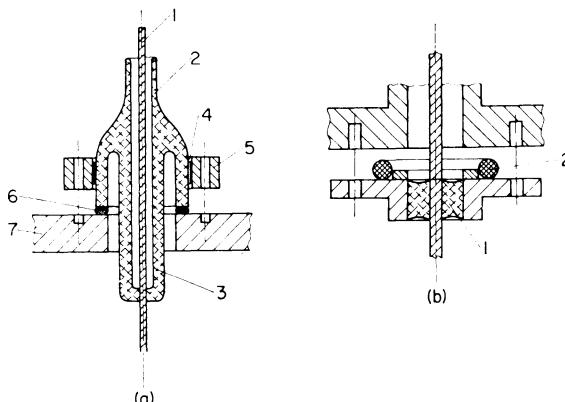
Glass-metal seal used in demountable joints: (a) attached electrode; (1) copper electrode; (2) Pyrex glass; (3) W 1 glass; (4) asbestos; (5) backing flange; (6) gasket; (7) wall of the metal container. After Nelson⁹¹⁶ (*Courtesy of The Institute of Physics and The Physical Society, London*); (b) compression seal (1) connected by gasket (2)
